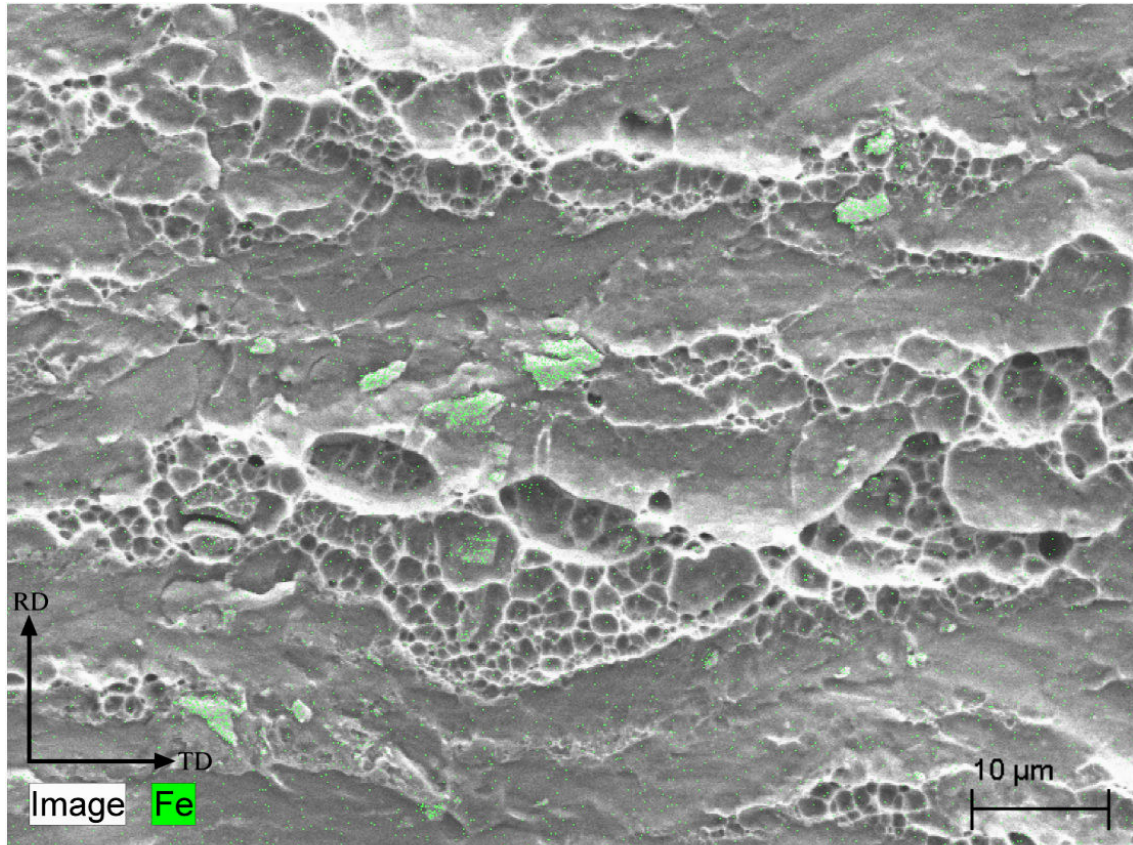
SBA-150 sample at 1000X, with 10 kV of acceleration voltage. The image shows the aluminum fracture surface, with iron indicated by the green color. The fracture surface appears ductile, and embedded with a few iron-rich particles.
